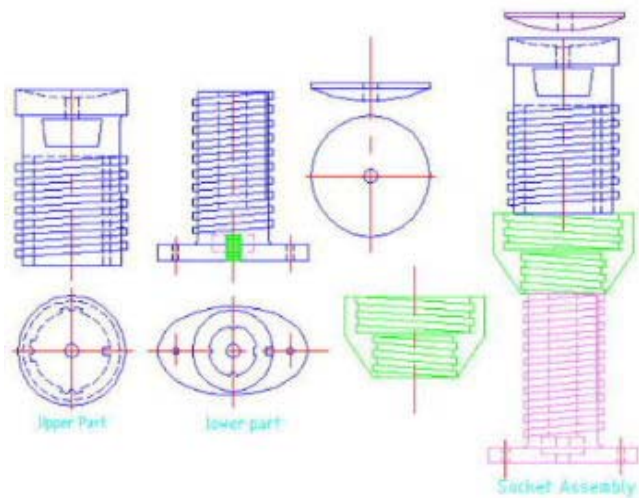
Auto-Cad Drawing of Parts of adjustable Pylon
